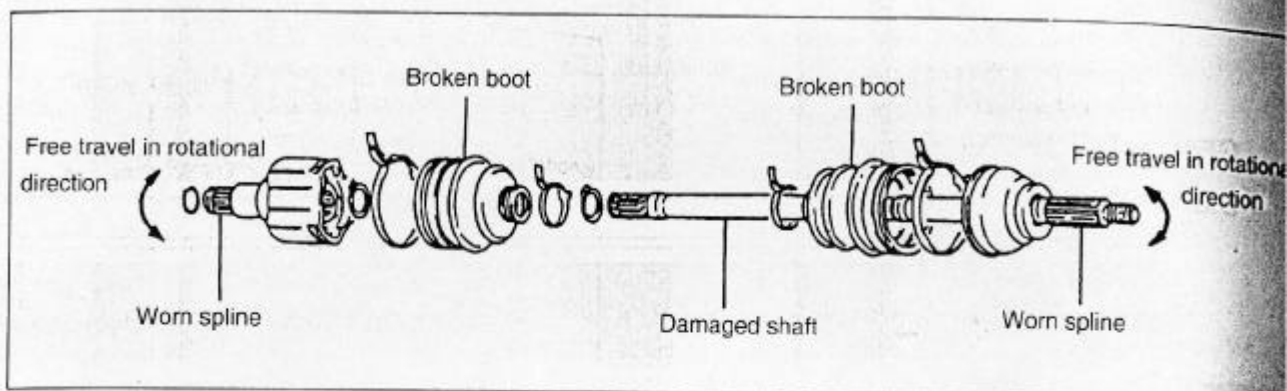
2 DISASSEMBLING DRIVE SHAFT
